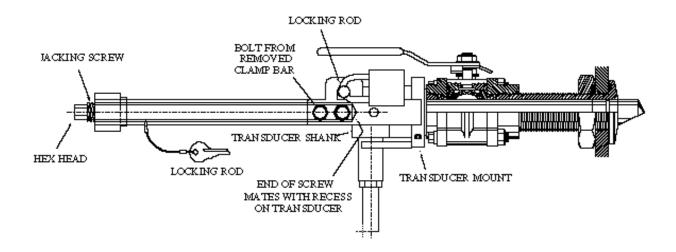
7600 Transducer Assembly with Extraction Tool Installed
